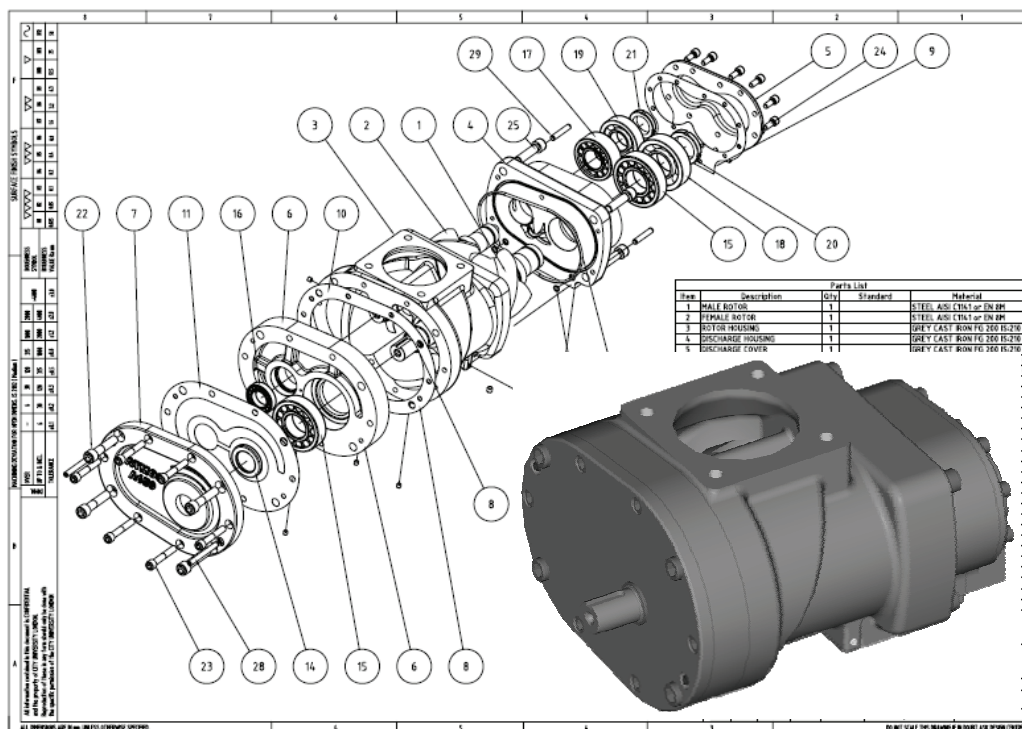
Model and drawings generated by DISCO with Mechanical Desktop
